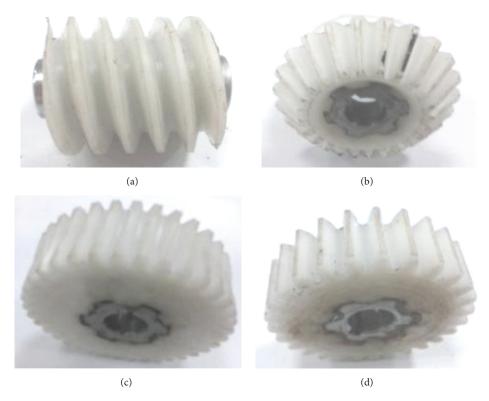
Tested polymer gears: (a) worm gear, (b) bevel gear, (c) wheel gear, and (d) spur gear.
